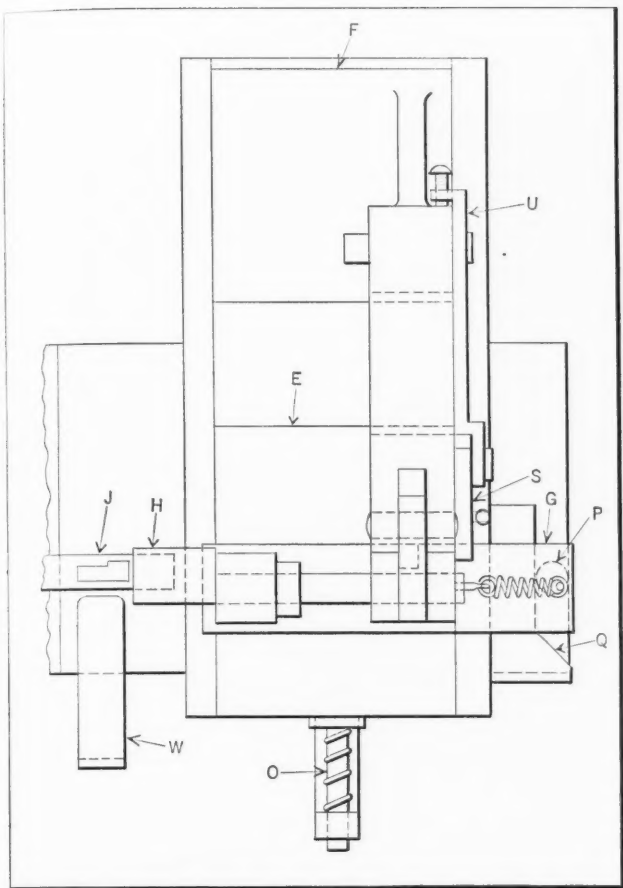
Plan View of Transfer Mechanism, Showing the Position of the Part after Entering the Transfer Member
